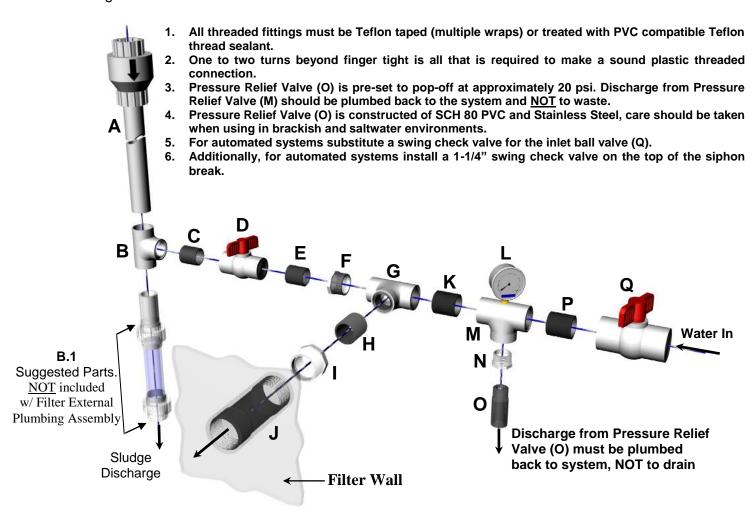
External Plumbing Configuration Details and Assembly Diagram
